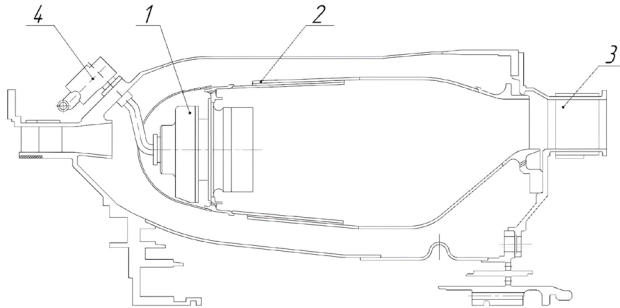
Longitudinal cross-section of the combustion chamber: 1 – swirler; 2 – flame tube; 3 – nozzle apparatus; 4 – additional fuel collector
